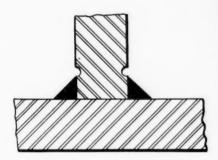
How stress may be relieved when very heavy sections are to be welded.
